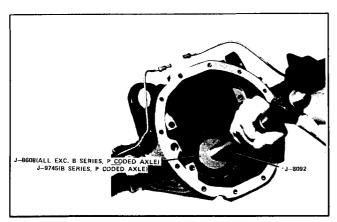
C-13 Installing Rear Pinion Bearing Outer Race
